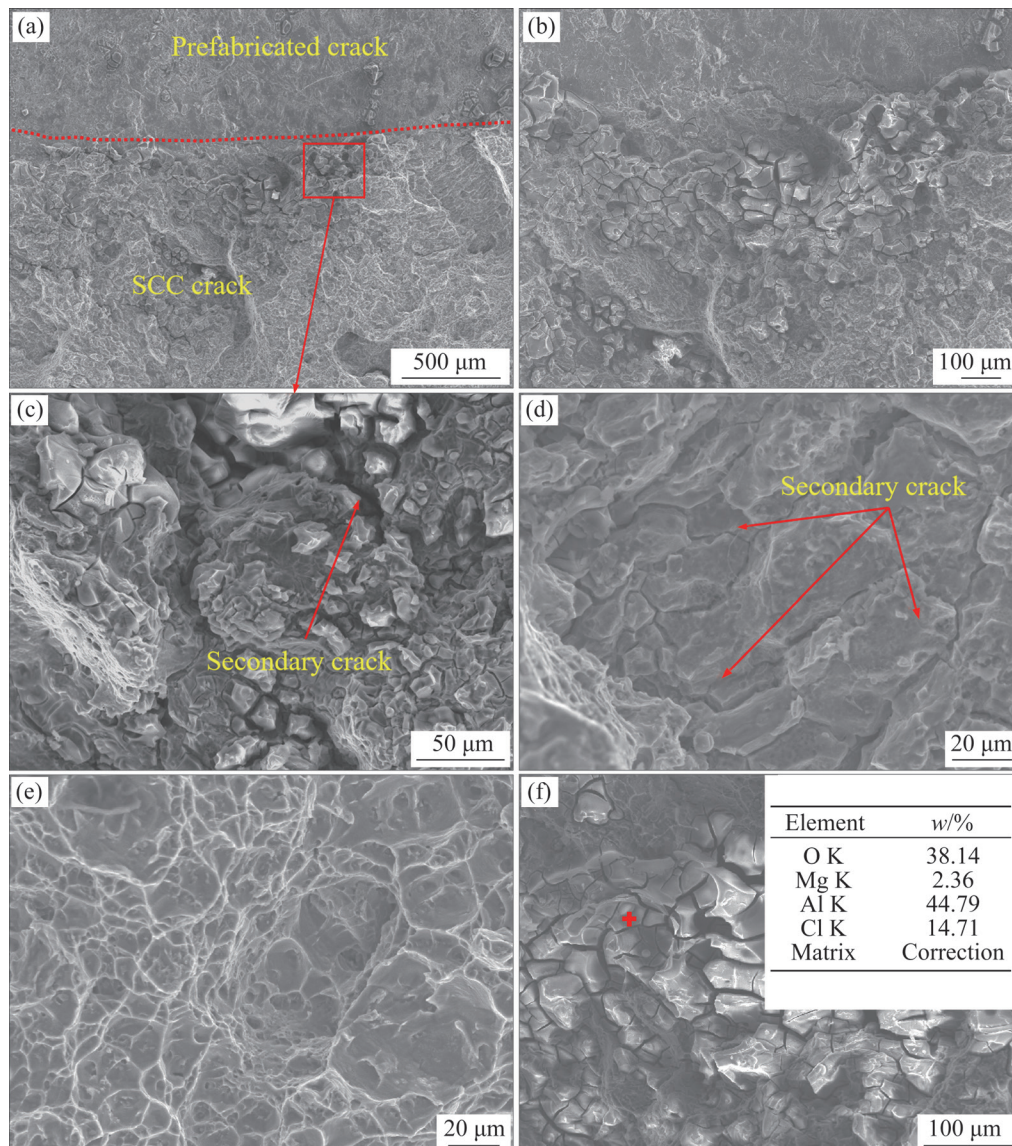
SEM morphology of fractures of WZ samples: (a) Fracture morphology; (b) Fracture interior; (c) Secondary cracks; (d) Secondary cracks; (e) Dimples; (f) Corrosion products
